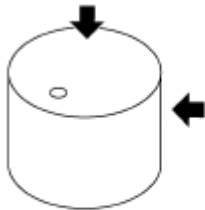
Measuring Camshaft Sprocket (EXH) Runout
